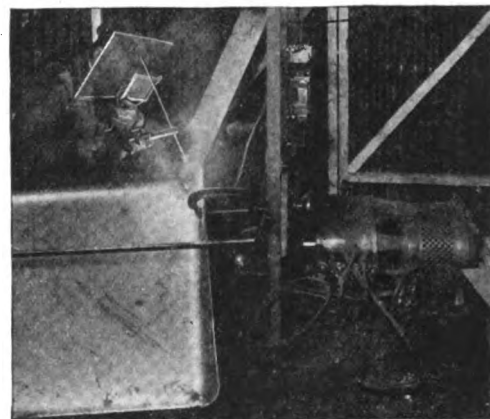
Metal Electrode Welding. The electrode in this case, is a metal wire of small diameter and this wire gradually melts itself away, furnishing metal for the weld
